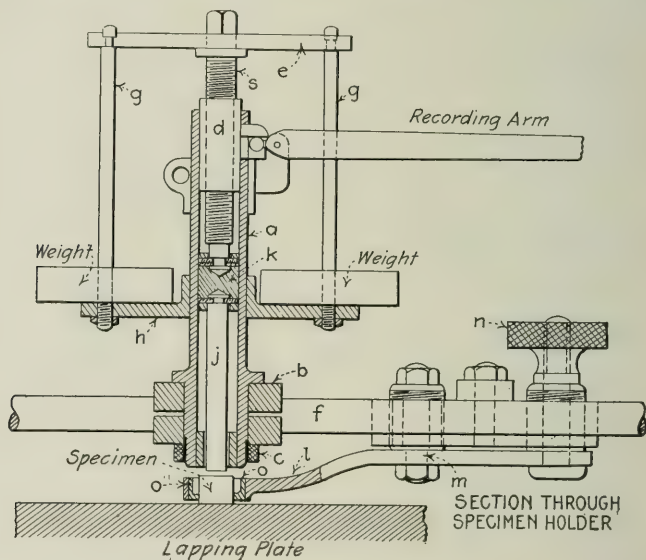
SECTION THROUGH SPECIMEN HOLDER
